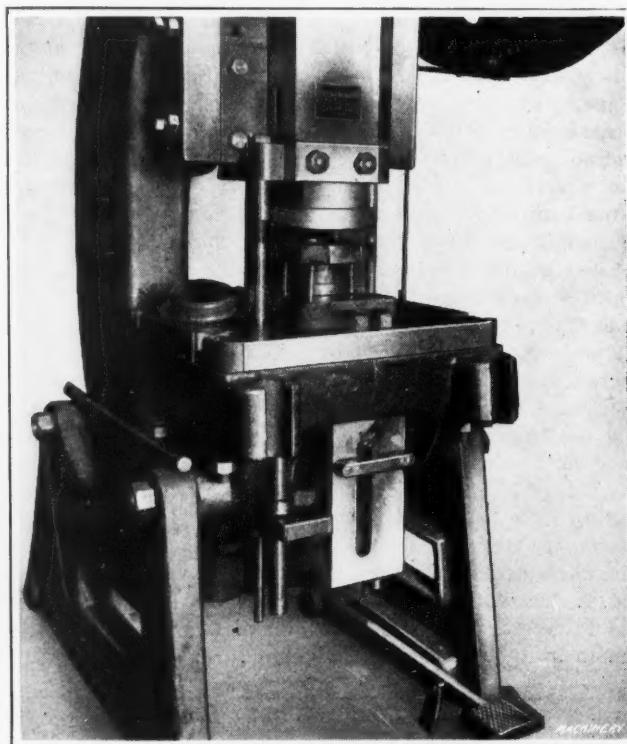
Punch Press Attachment built by the Gem City Machine Co. for supporting the Pressure-ring in Drawing Operations
